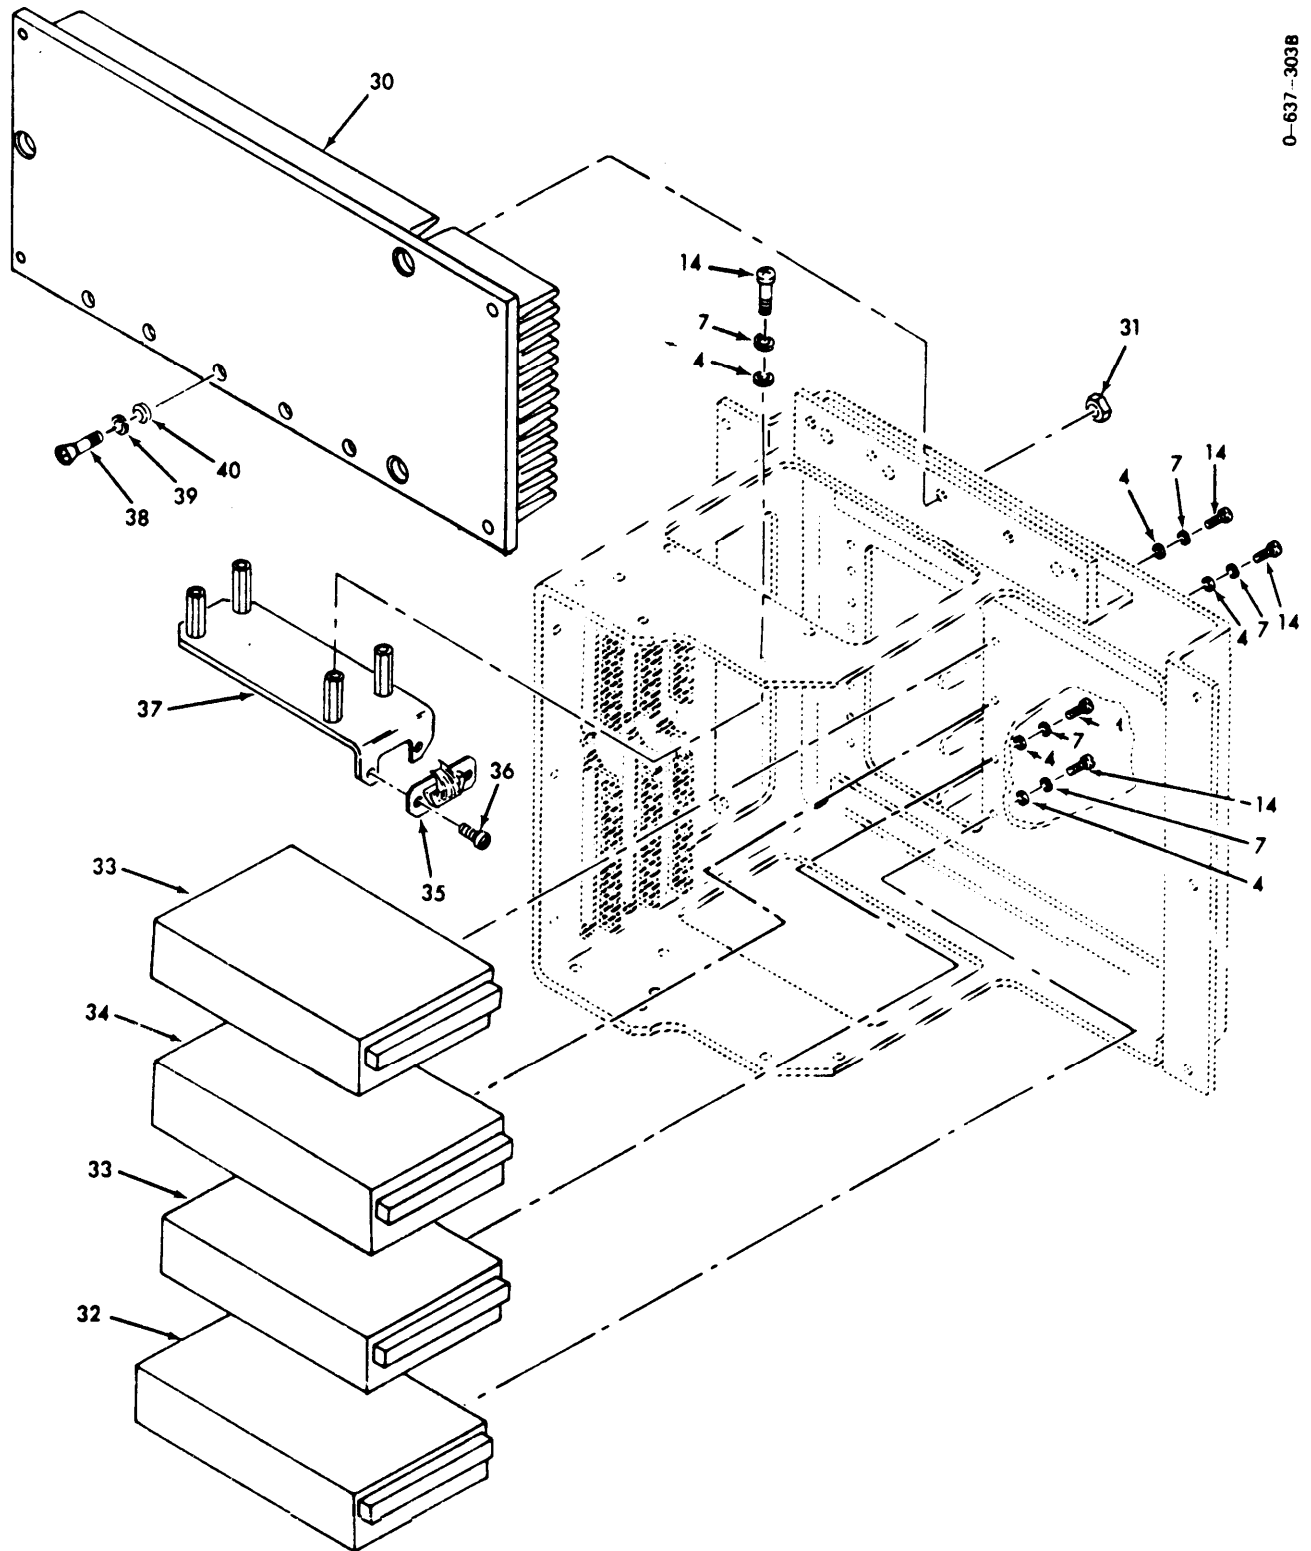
POWER MODULE ASSEMBLY A6 COMPONENT PARTS
